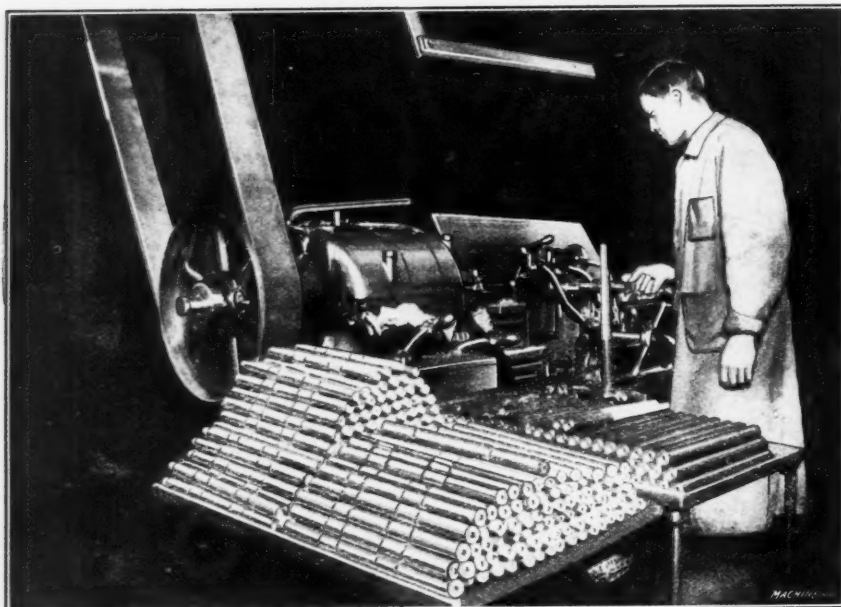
Rough-turning Armature Shafts in a "Lo-swing" Lathe
